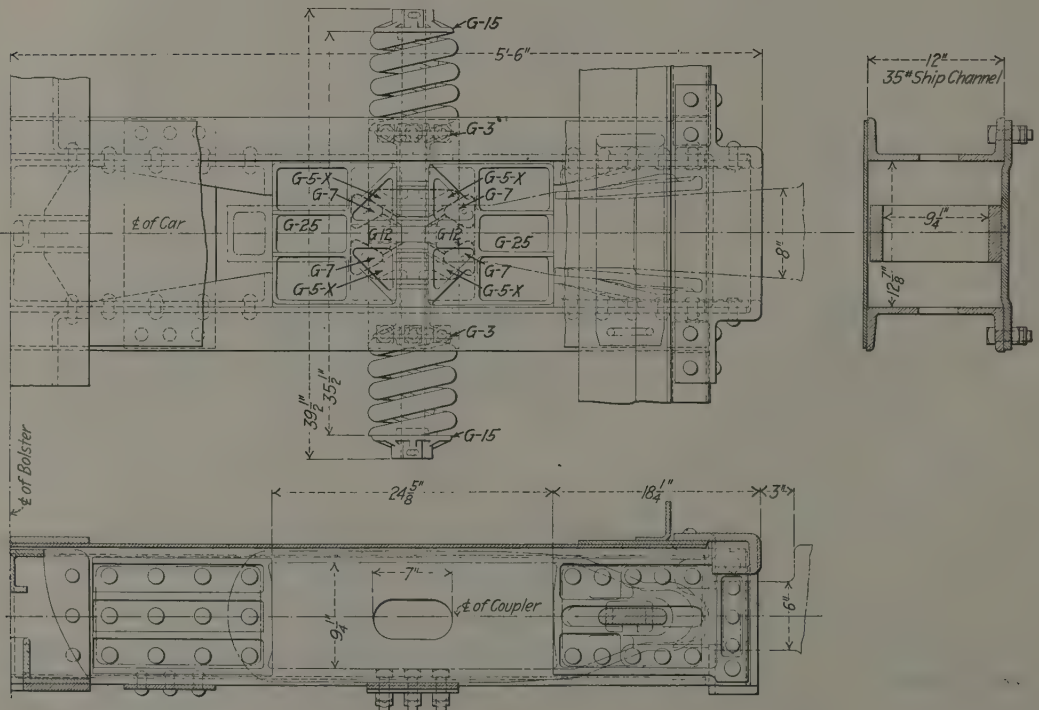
Cardwell Friction Draft Gear Type G Class 25-A. Union Draft Gear Company.
